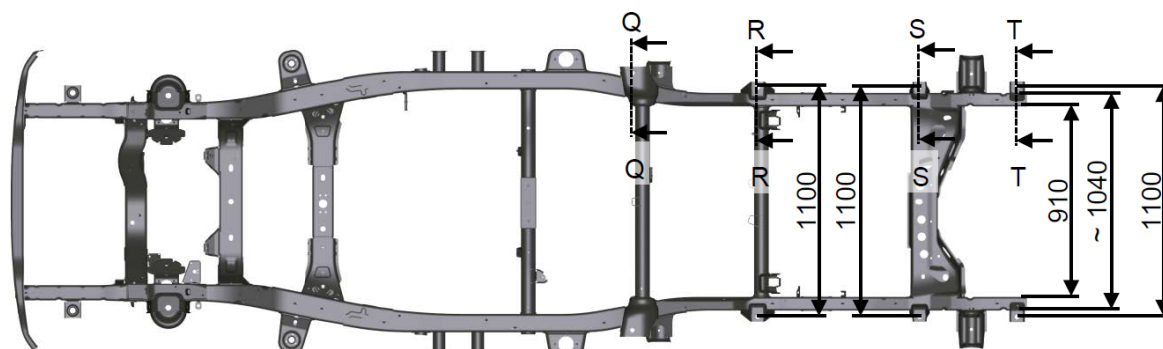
Plan view of ladder frame AMAROK SC
